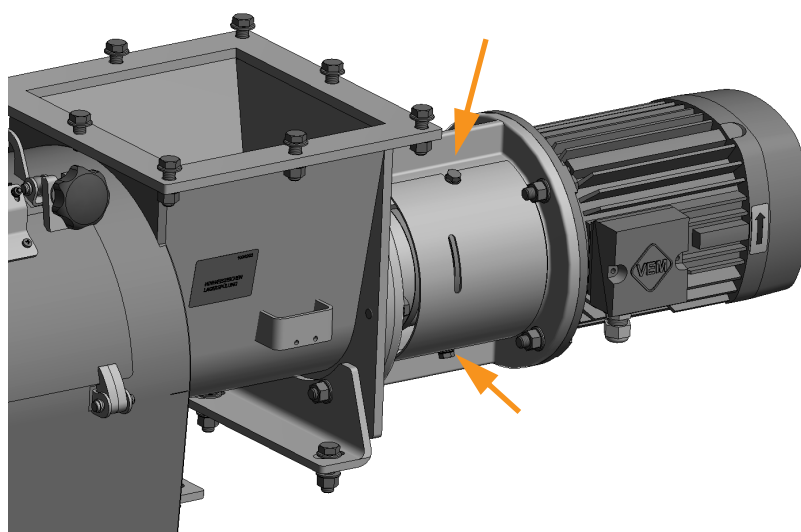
Bearing housing (drive side): Remove bolts on protective plate.
